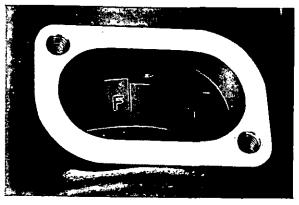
Static Timing Mark—Later Fuel Pumps.
